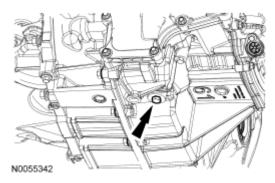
Locating LH VCT Housing Courtesy of FORD MOTOR CO.
